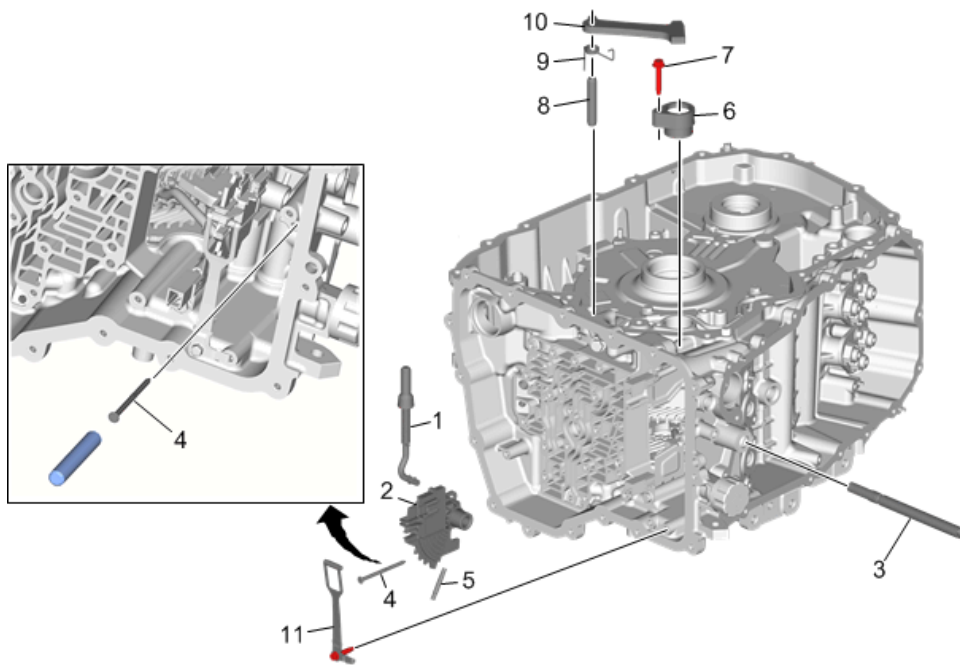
Manual Shift Detent Lever With Shaft Position Switch Assembly And Park Pawl Actuator
